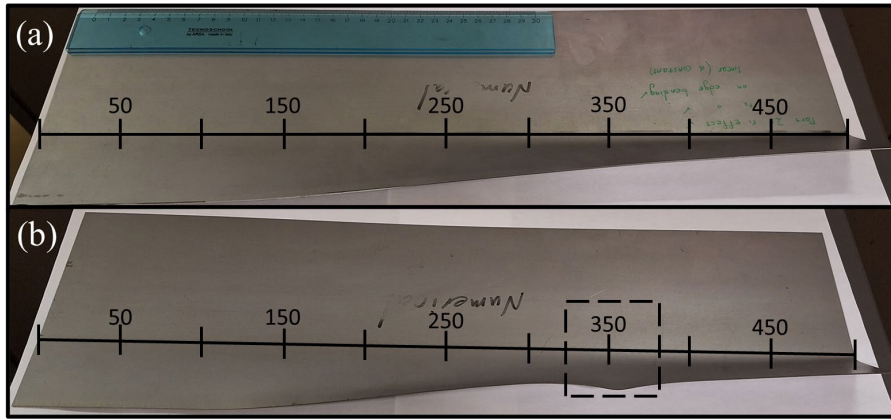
The workpiece photograph for (a) part A; (b) part B
